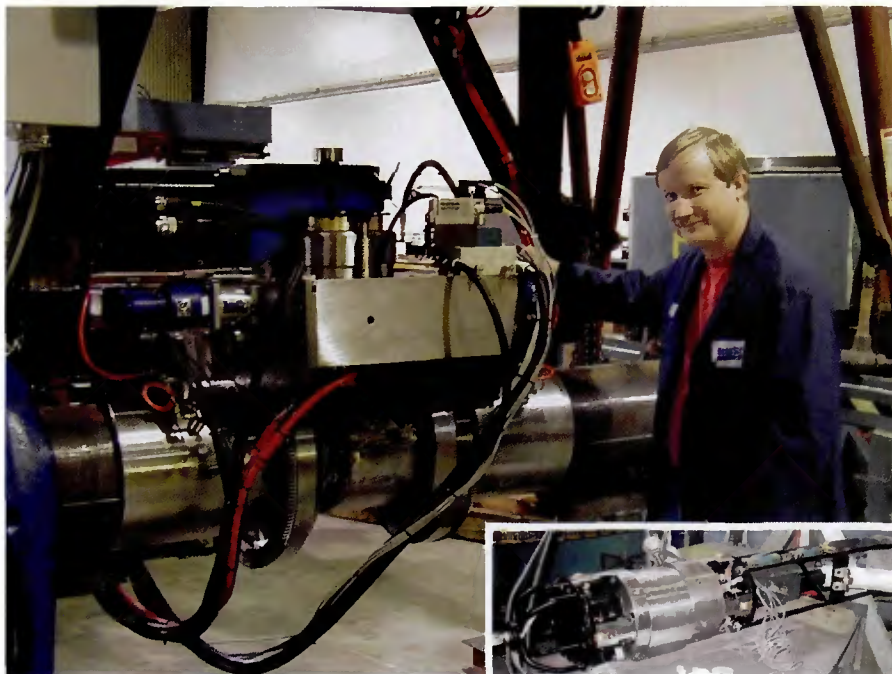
Prototype pipe welding system showing external FSW head and internal mandrel (inset). Courtesy of MegaStir, Inc.
